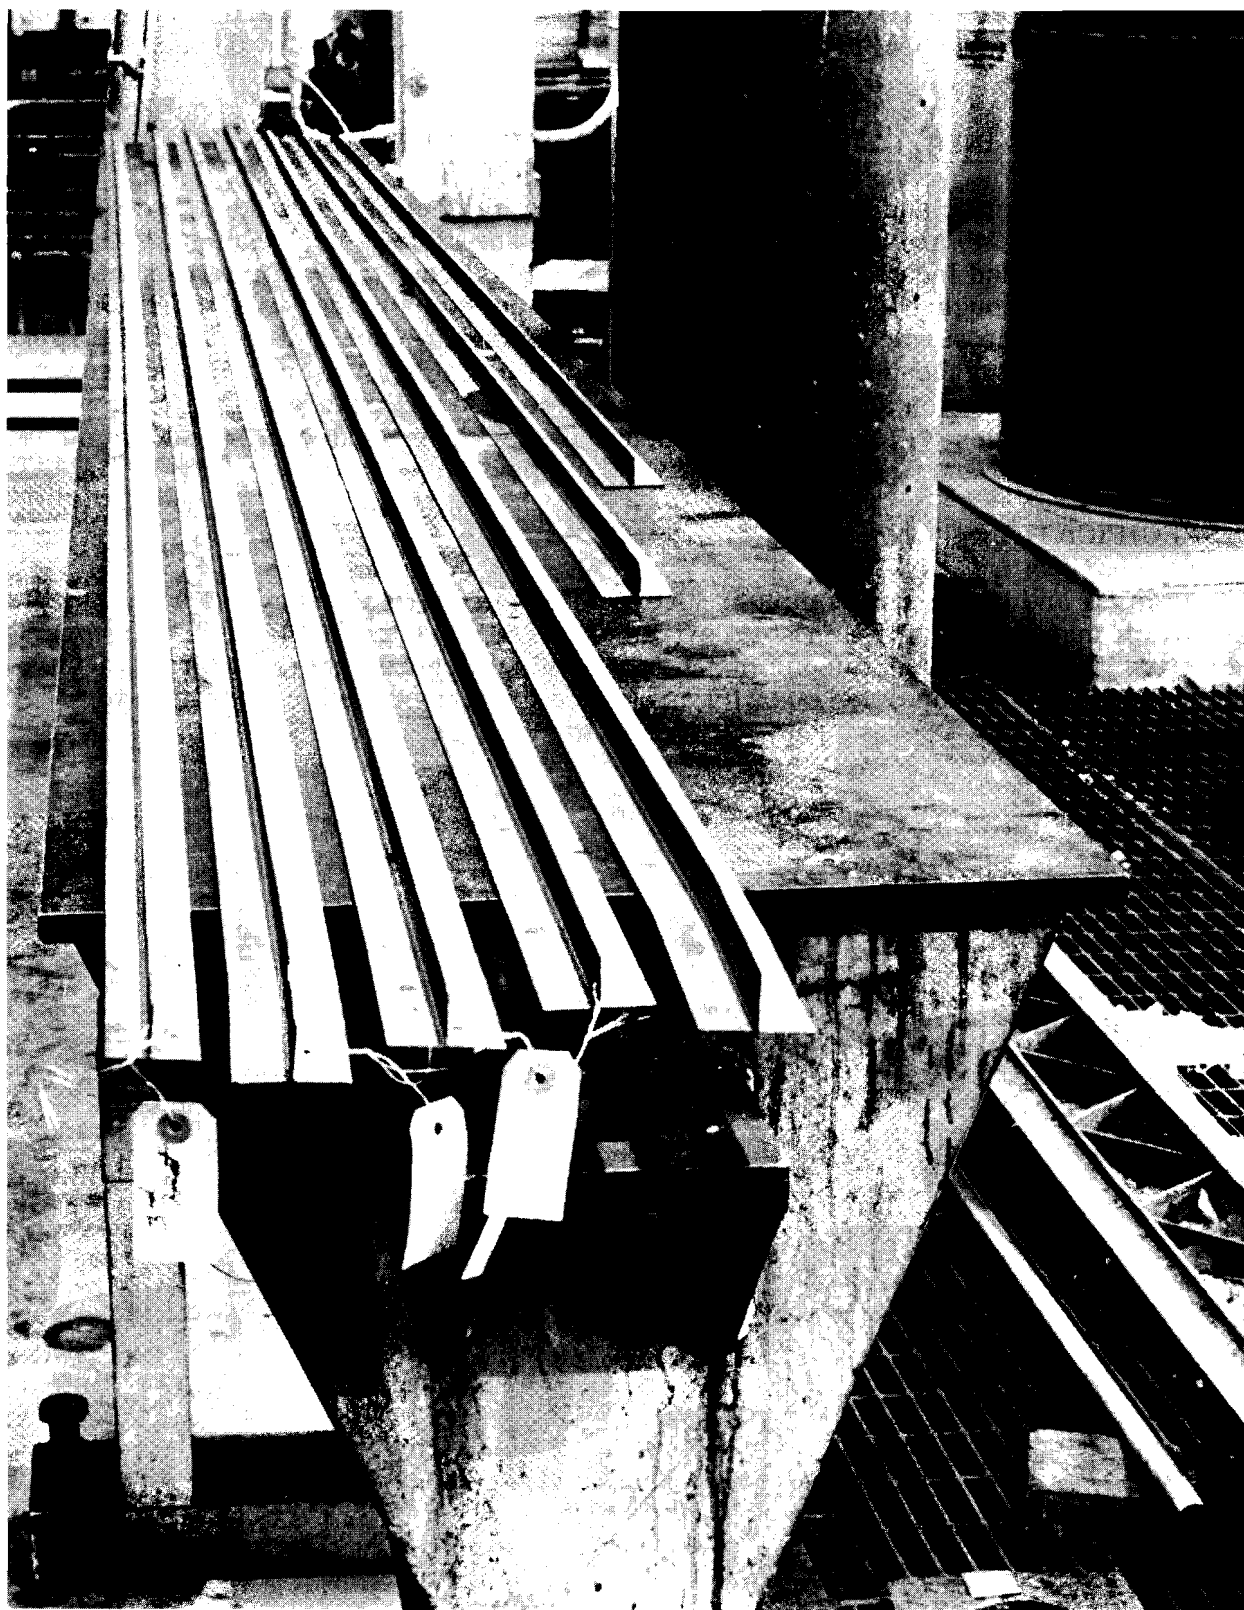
PHOTOGRAPH OF HEAT TREATED (260-280 KSI) AISI 4340 EXTRUDED AND DRAWN TEE SHAPES SHOWING STRAIGHTNESS AND LENGTH
